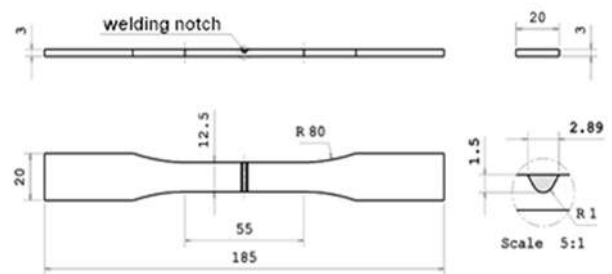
Geometry of tensile specimens with welding notch.
